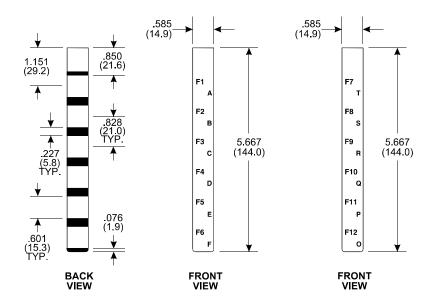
3408KP F1-F12 Insert Dimensions
